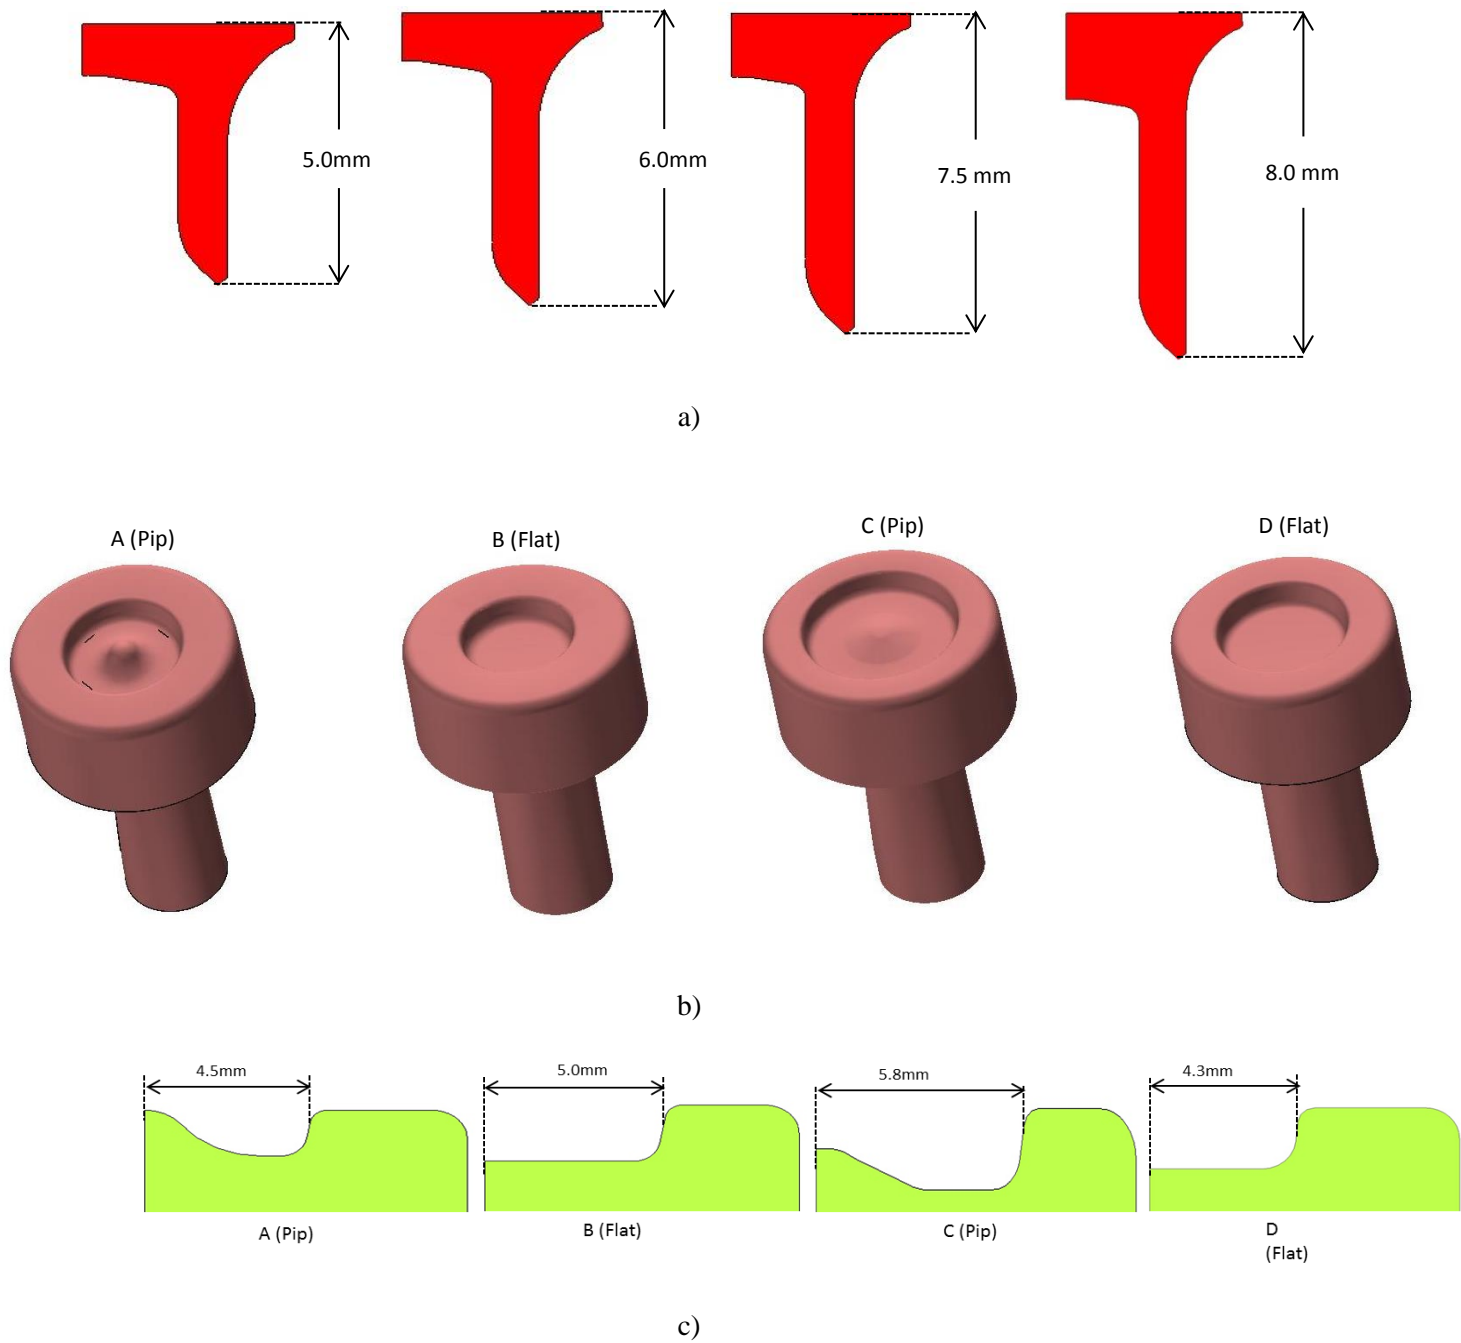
a) Rivet cross-sectional shapes. b) Die geometries. c) Die cross-sectional shapes
